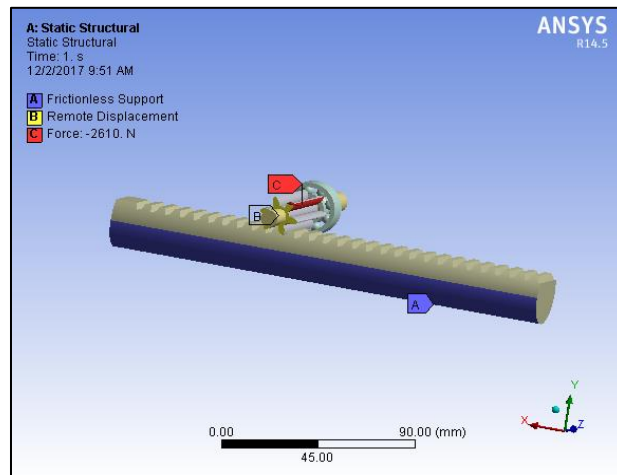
Fixed and forced Condition of Rack and Pinion Gear Assembly
